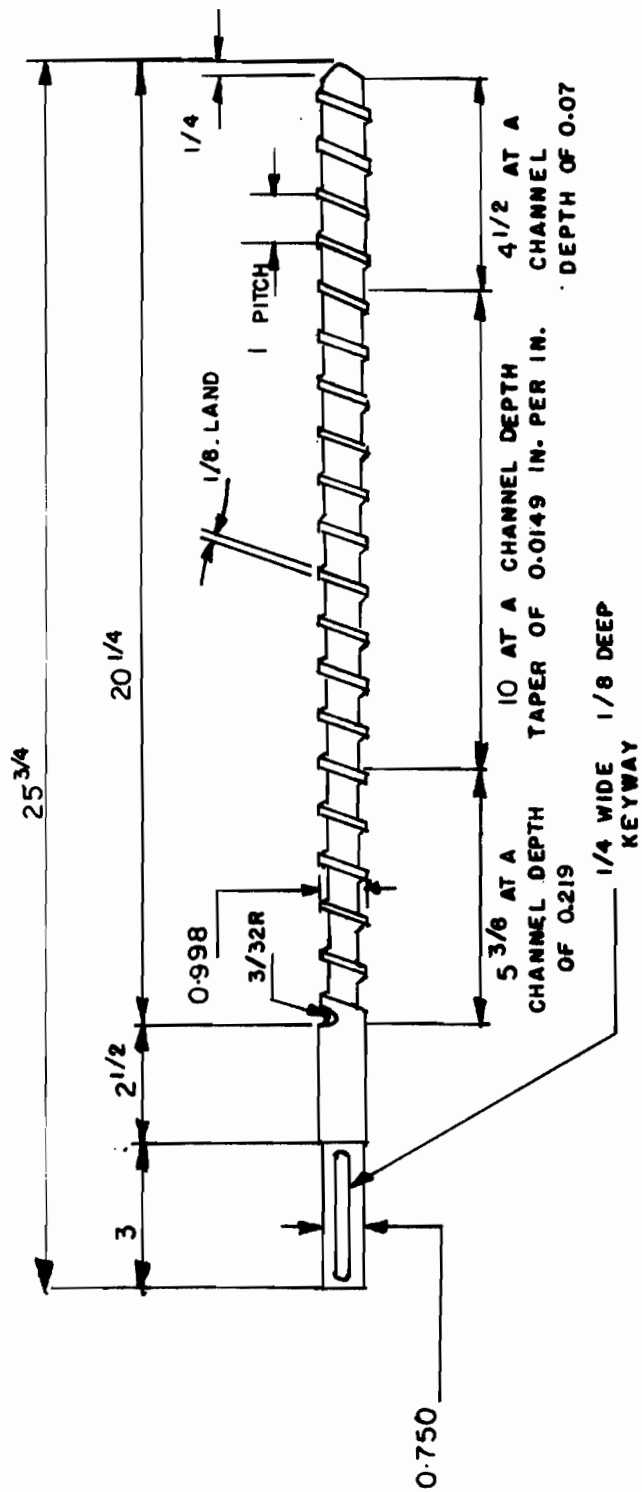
Detail drawing of metering type screw used. Note: All dimensions are in inches.
